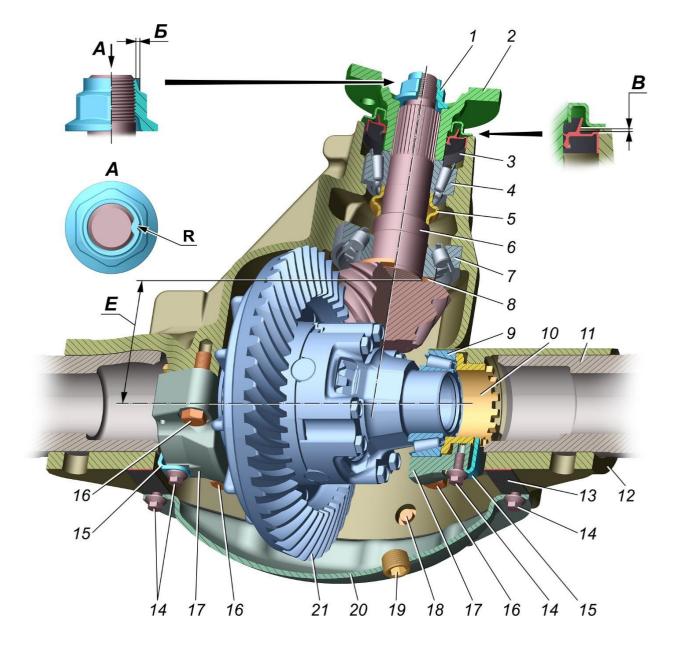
Rear axle reduction gear with axle casings: B=0.8mm, min.; B=0.9-1.5mm; R=1.2mm, min.; 1 - nut; 2 - drive gear flange; 3 - collar seal; 4,7,9 - bearings; 5 - spacer bushing; 6 - drive gear; 8 - adjustment ring; 10 - differential bearing nut; 11 - axle shaft casing; 12 - rear axle housing; 13 - gasket; 14,16 - bolts; 15 - retainer plate; 17 - differential bearing cover; 18 - magnetic plug; 19 - oil filler plug; 20 - housing cover; 21 - differential with driven gear
